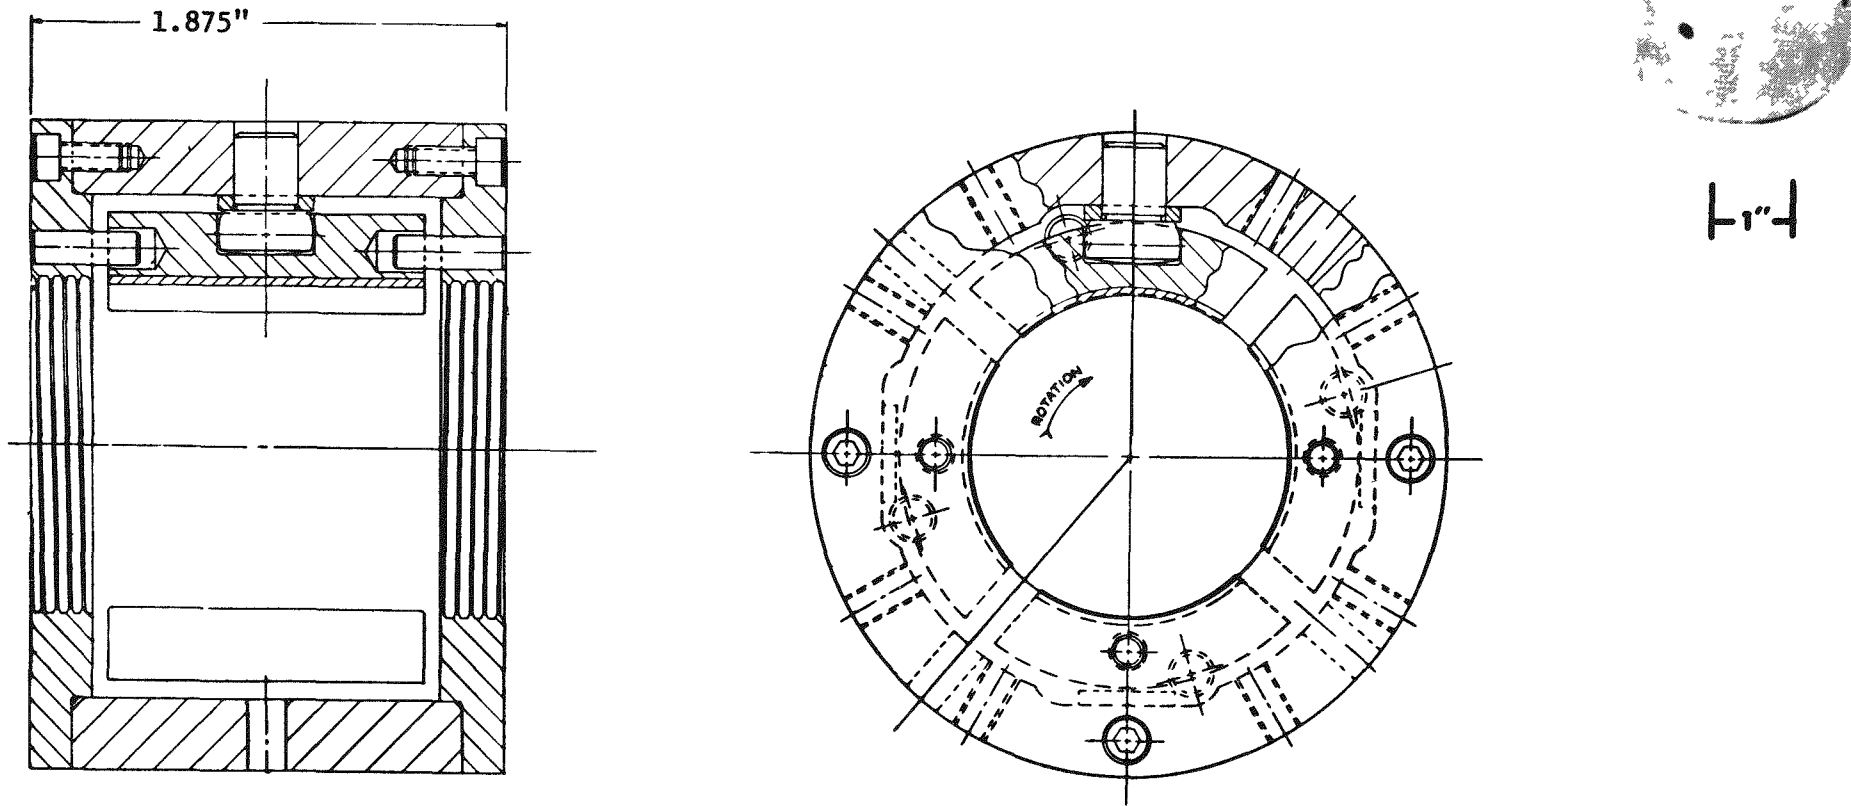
Self-Aligning Pivoted Pad Bearing.
